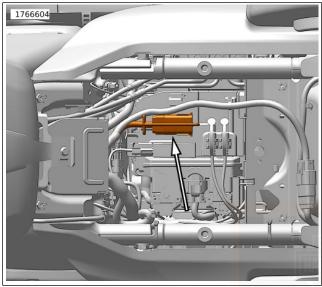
Accessory Connector (under seat) HEADSET CONNECTION
